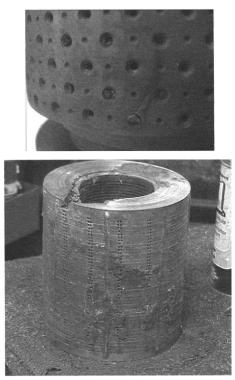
Weld slag and other debris lodged in drilled hole or stacked disk cages
